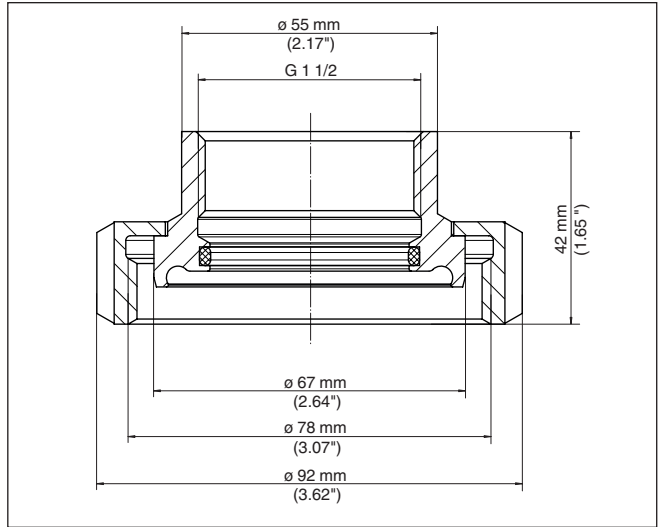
Dimensions of threaded adapter G1 1/2 (DIN 3852-X) on slotted nut DN 50 (DIN 11864-1) PN 16
